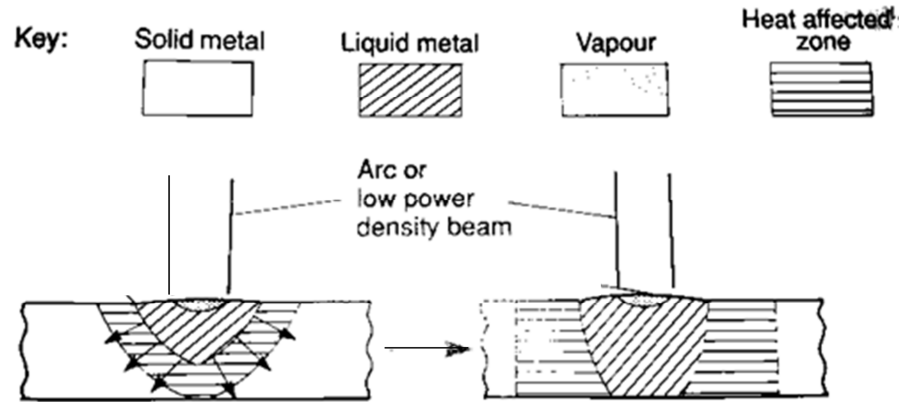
Mechanisms of laser welding (Dawes 1992)
